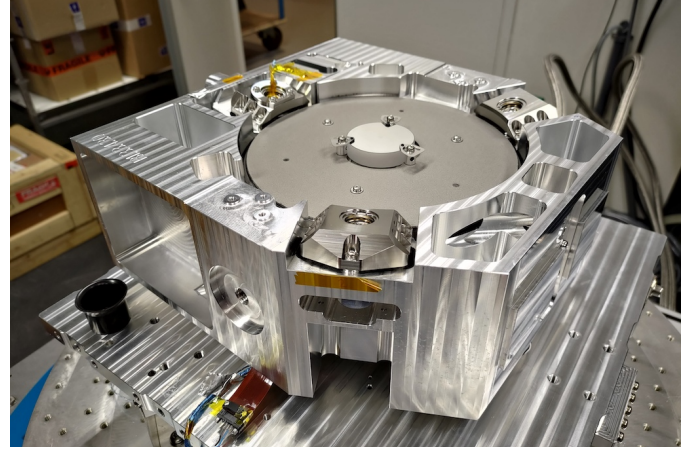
The MICADO ADC mechanism prototype, a thermomechanical representation of the conceptual design. Three smaller bearing wheels both carry and drive the larger rotor wheel in the middle. The roller wheel in the top-left is driven by a Phytron stepper motor.
